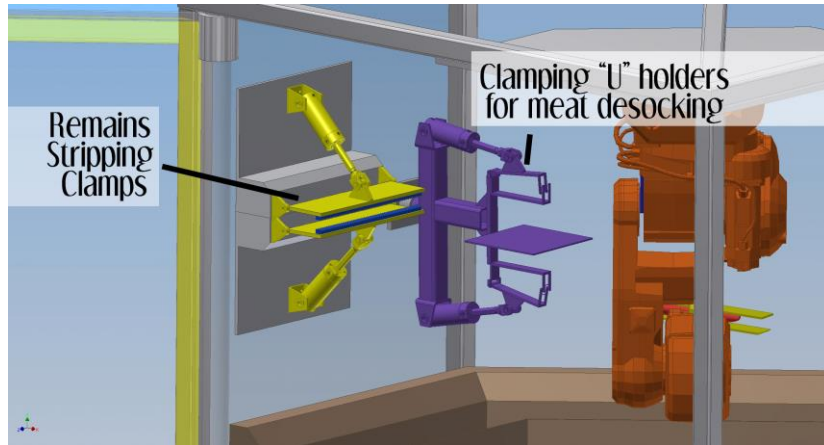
Clamping "U" holders and Stripping clamps for final meat desocking and stripping.
